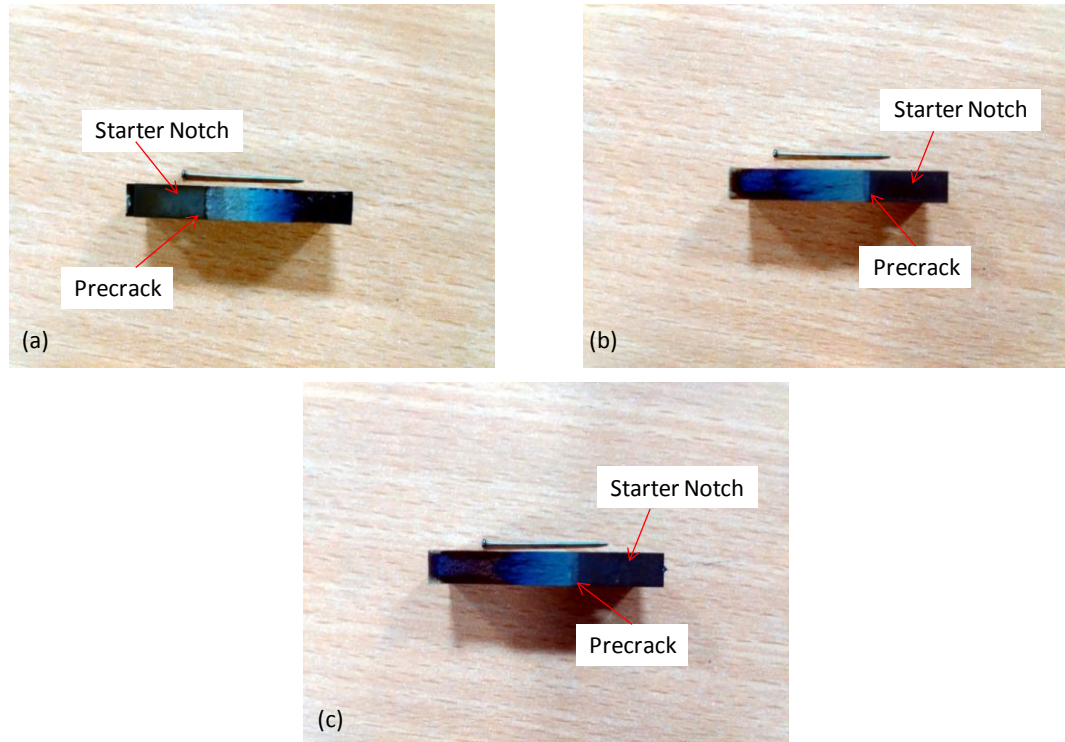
Photographs of fatigue crack growth tested specimen at (a) 300°C (b) 450°C and (c) 600°C
